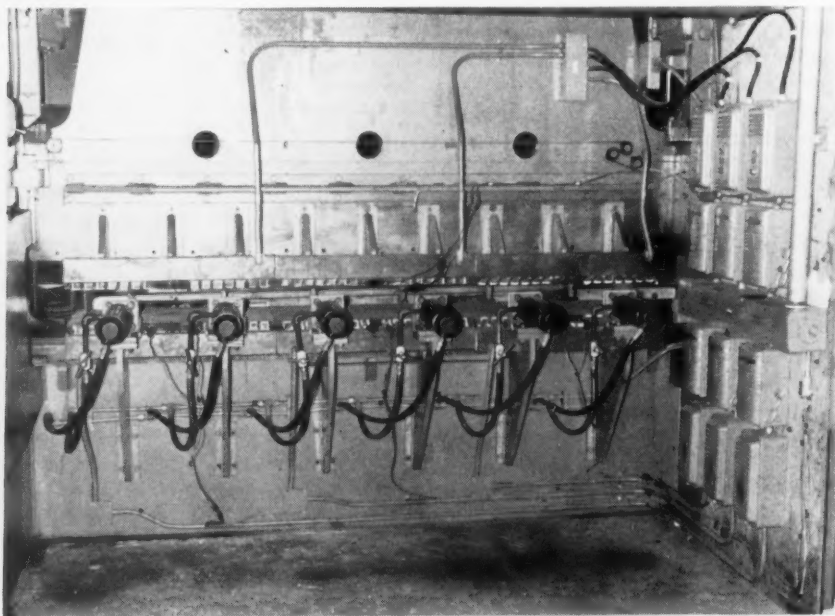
Six pressure cylinders mounted at the rear of the press brake apply horizontal pressure on the part being hot formed to assure close conformity with die contours.
